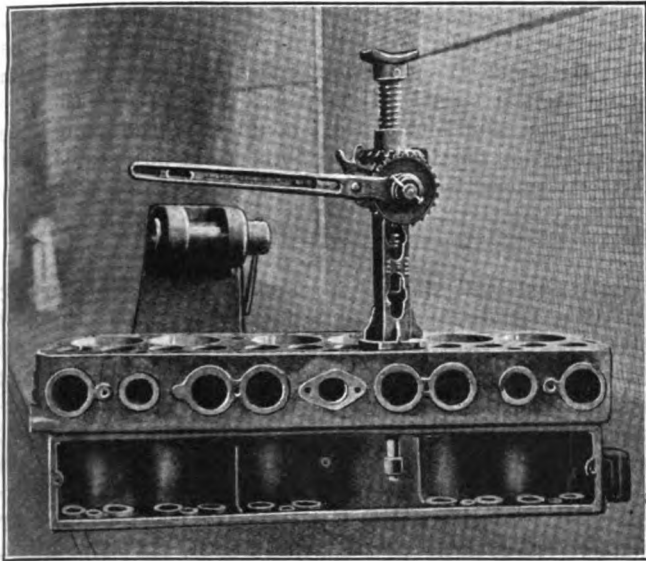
VALVE GUIDE ASSEMBLING TOOL
